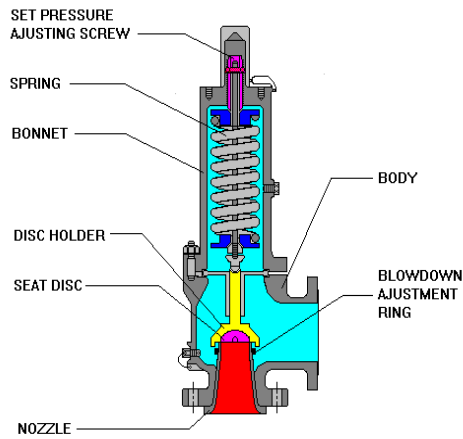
Fig. II Spring/Direct Acting, Relief Valve -simple spring type relief valve
